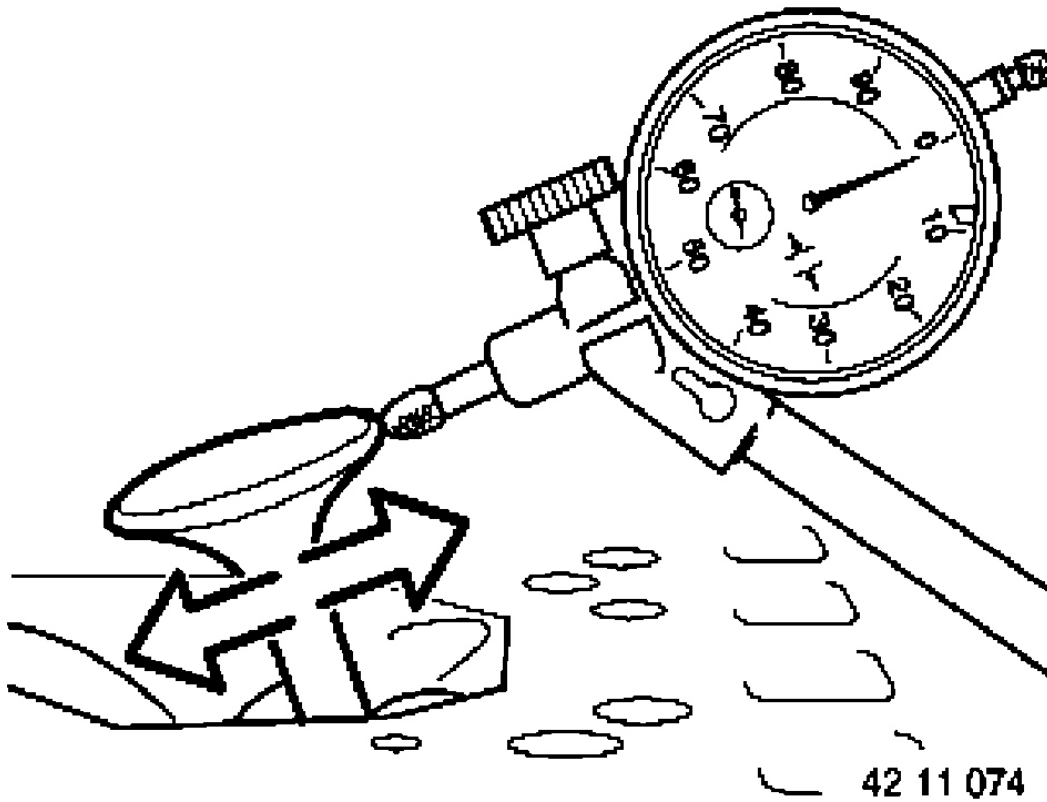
Measuring Tilt Clearance Using Dial Gauge
